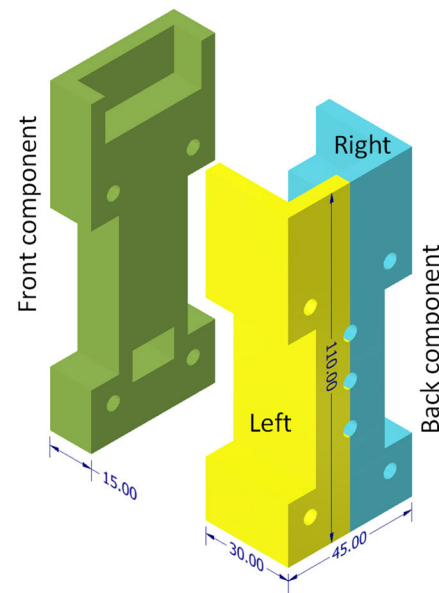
Mold design and specifications. This figure illustrates the design of a three-part mold used for mold flux analysis. It has a dimension of (110 × 45 × 45) mm when combined.
